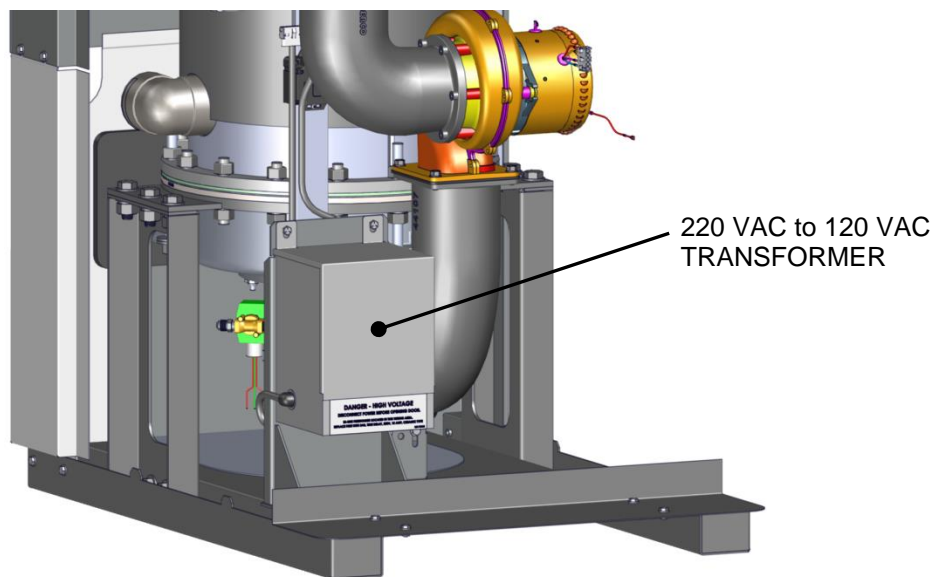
220V Transformer – Front Frame & Panel and Side Panels Removed
